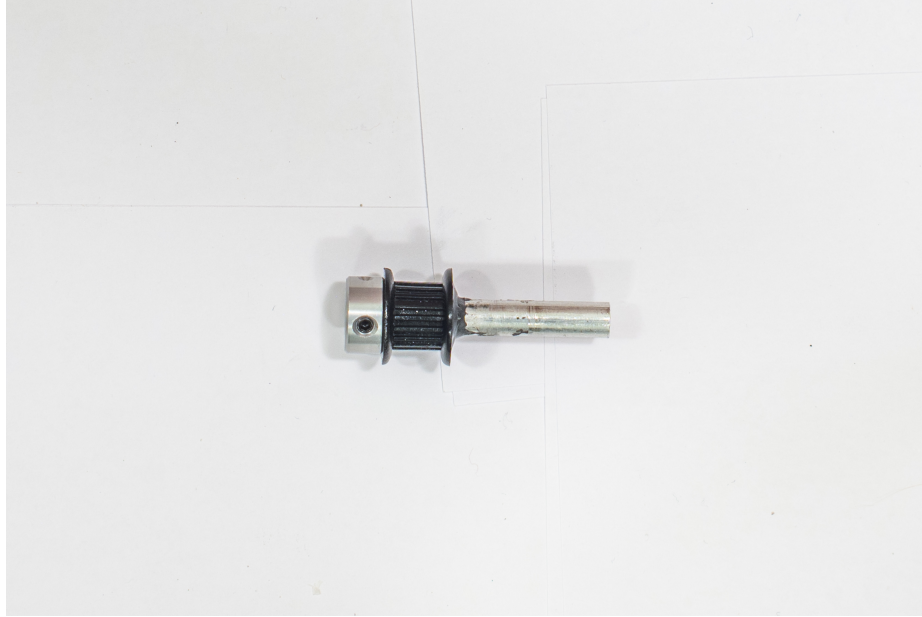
18mm Tooth Pulley, Modified with Aluminum Axle
